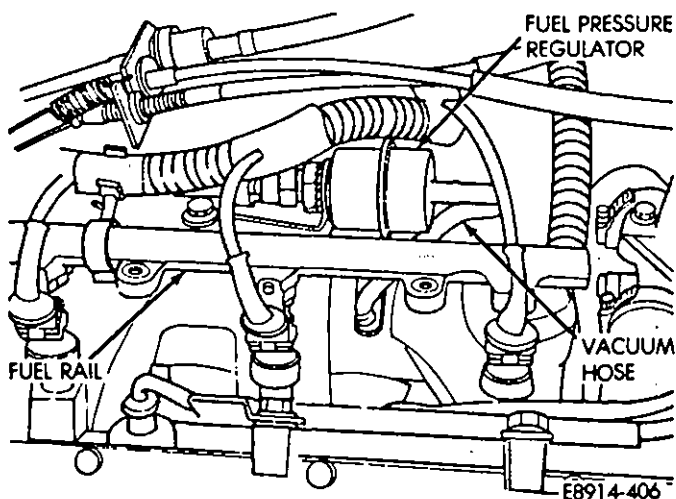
Fuel Pressure Regulator Vacuum Hose
